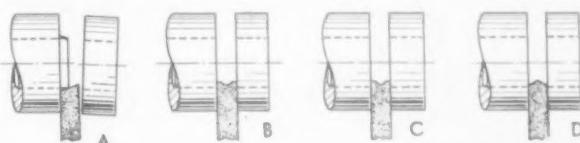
Various ways of grinding cut-off tools. Tool A tends to spring to right, while tools B, C and D will center, also, tend to break chips.
